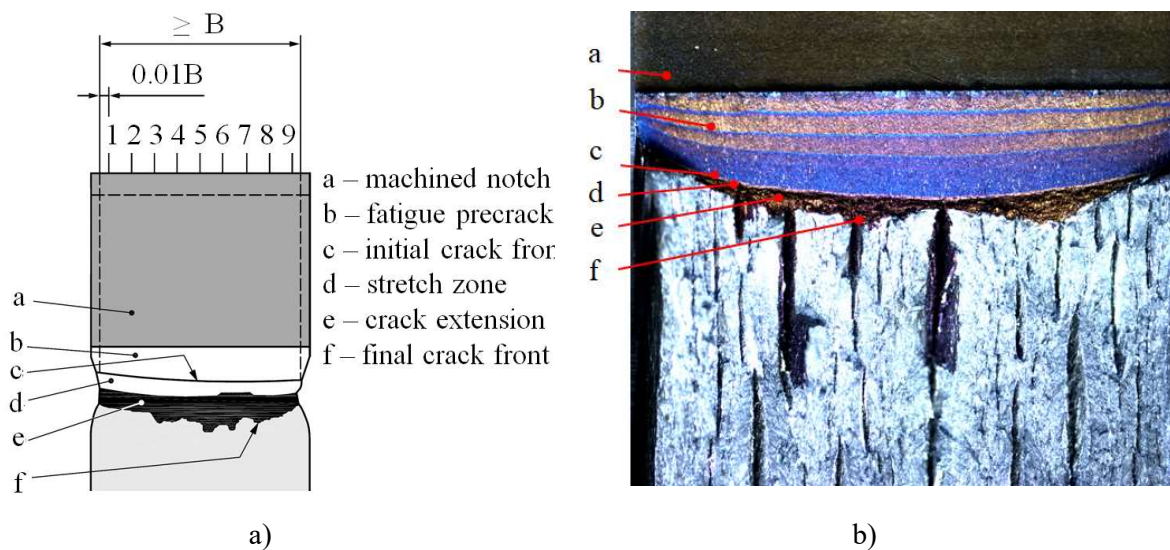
a) Crack length measurement on the broken open surfaces [10]; b) Fracture surface of one investigated sample, TM1_1
